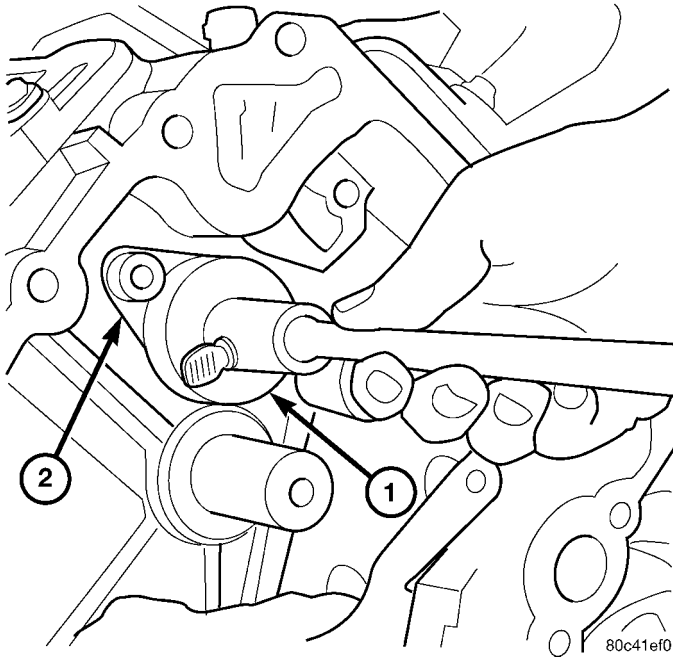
Counterbalance Shaft Removal/Installation Tool
